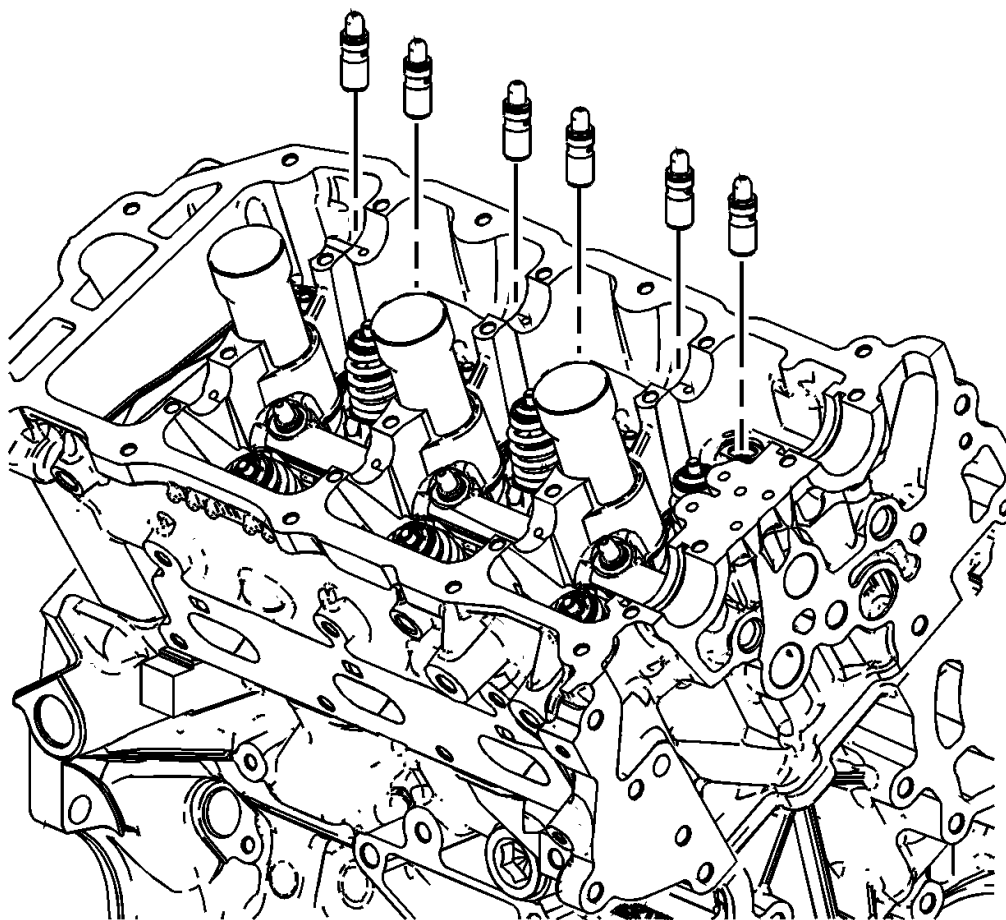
Identifying Stationary Hydraulic Lash Adjuster (SHLA)
